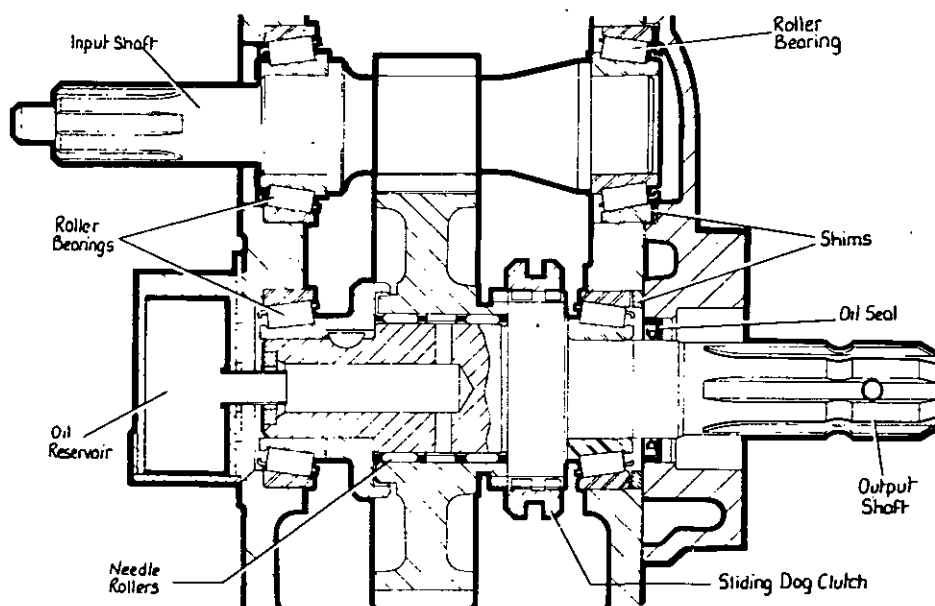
GEARS AND SHAFTS—SINGLE-SPEED POWER TAKE-OFF
